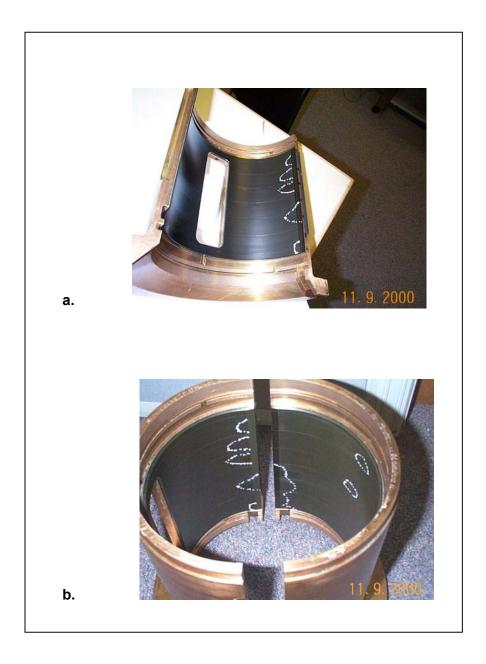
Damage to the Mark 2 Vespel®-lined bearing prior to rebore
